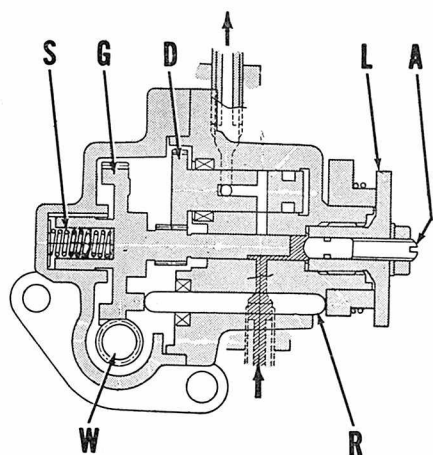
Cross sectional drawing of oil pump. The distributor (D) must be timed to gear (G) if pump is disassembled. Refer to text.
